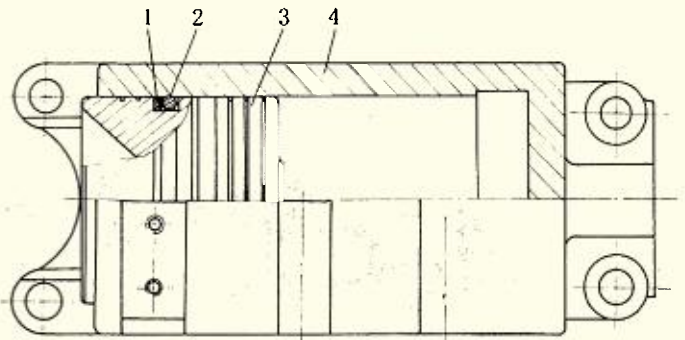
18 Jiangsu - 500 tractor hydraulic cylinder assy.
